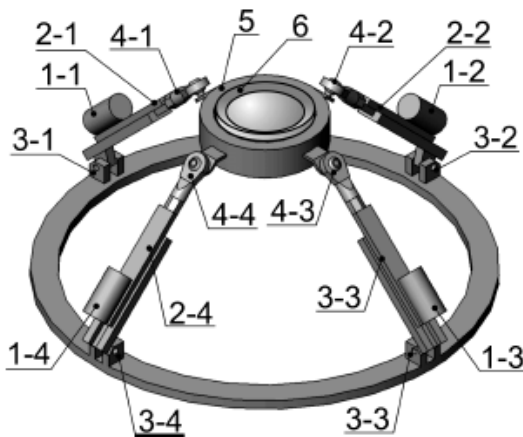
Modified Stewart platform. 1 – motors, 2 –sliding shafts, 3 – hinges, 4 – link ball joints, 5 – moving platform, 6 – lens
